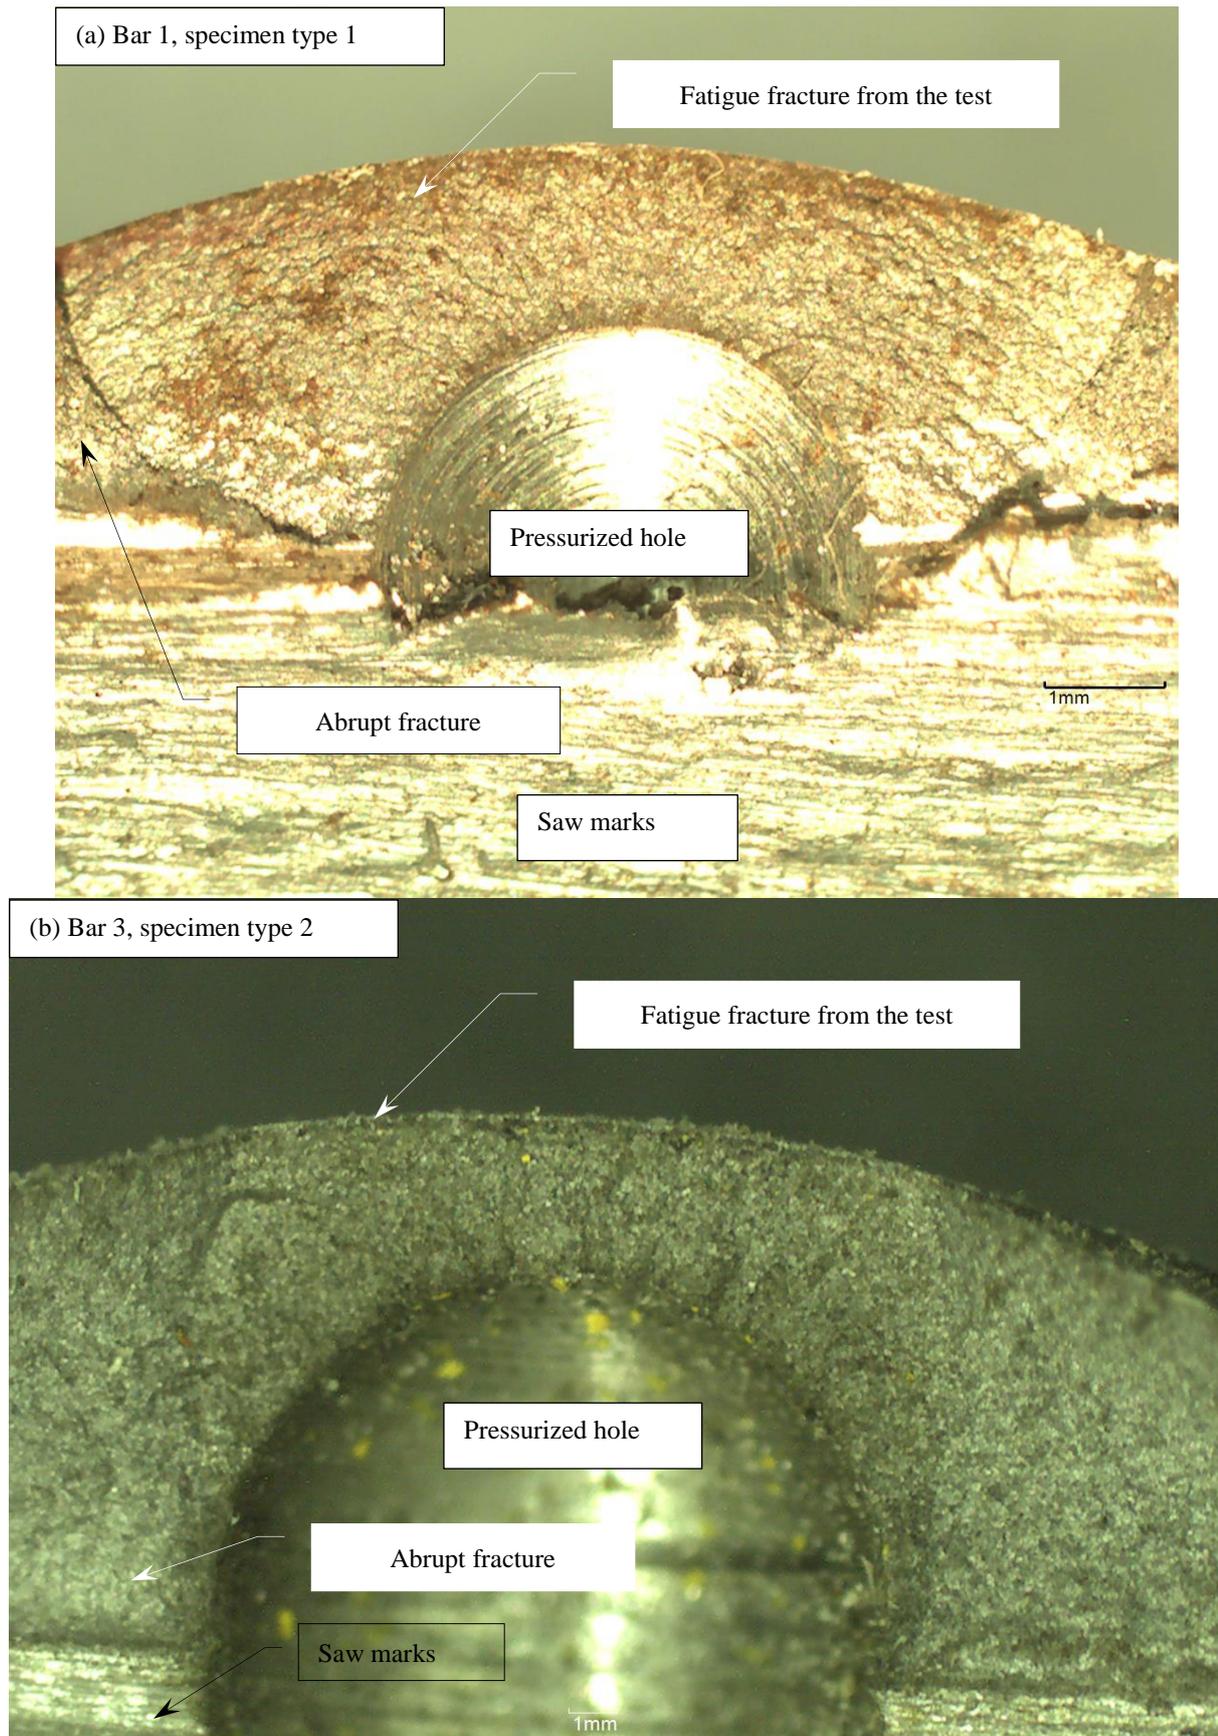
The fracture surfaces of the test specimen. (a) Type 1; (b) Type 2.
